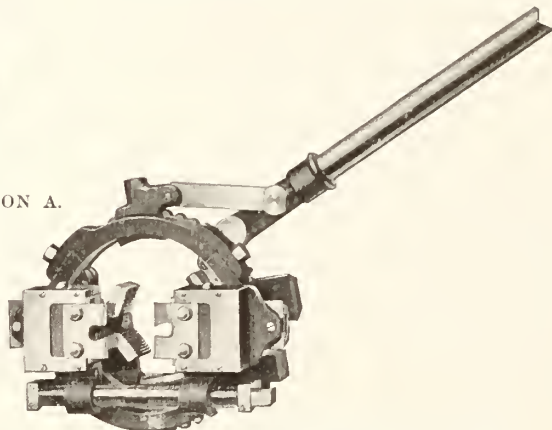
2½-4 IN. SQUARE END PIPE CUTTER.
